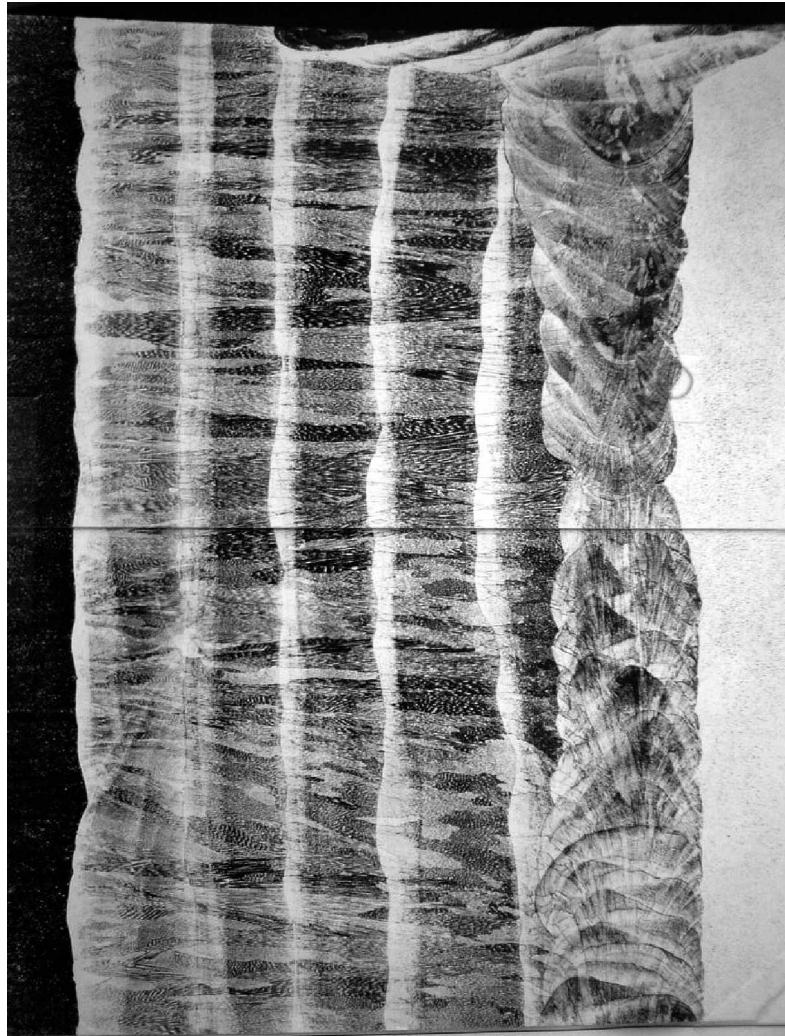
Narrow-gap weld (inconel weld between an inconel buttering and a wrought stainless steel part)
